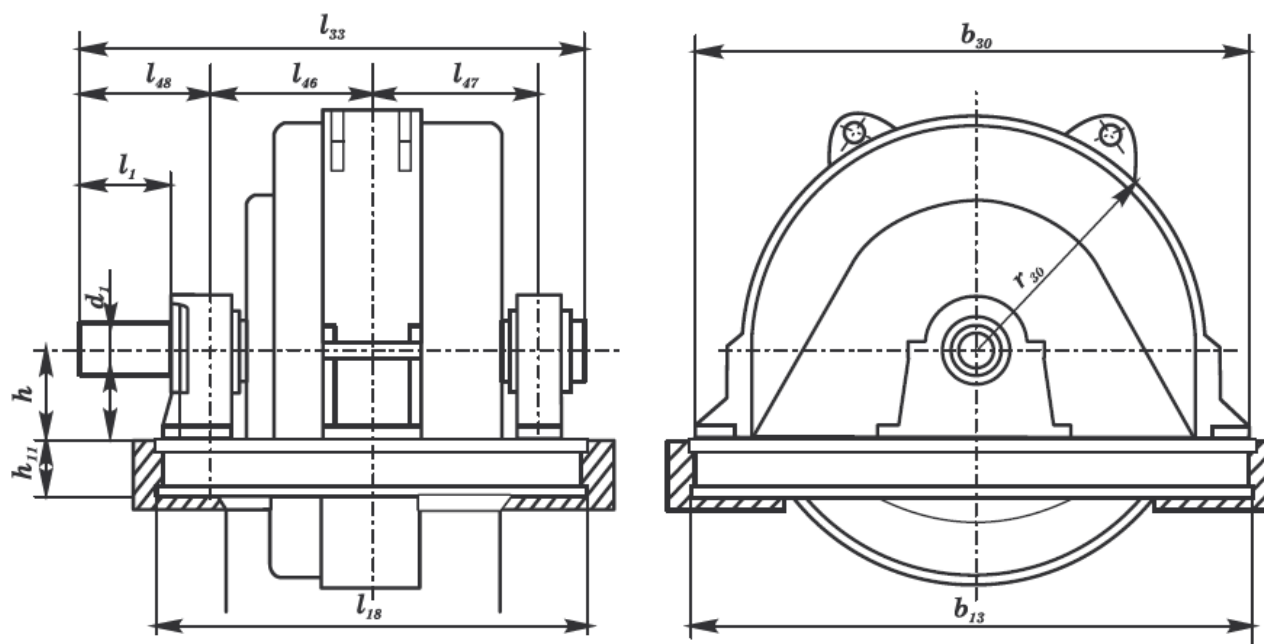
Overall and mounting dimensions of DC non-reversible motors series P2, sizes 20, 21 and 24.
